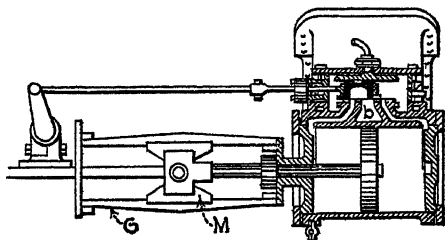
SECTION THROUGH SLIDE VALVE, CYLINDER, AND STEAM CHEST
